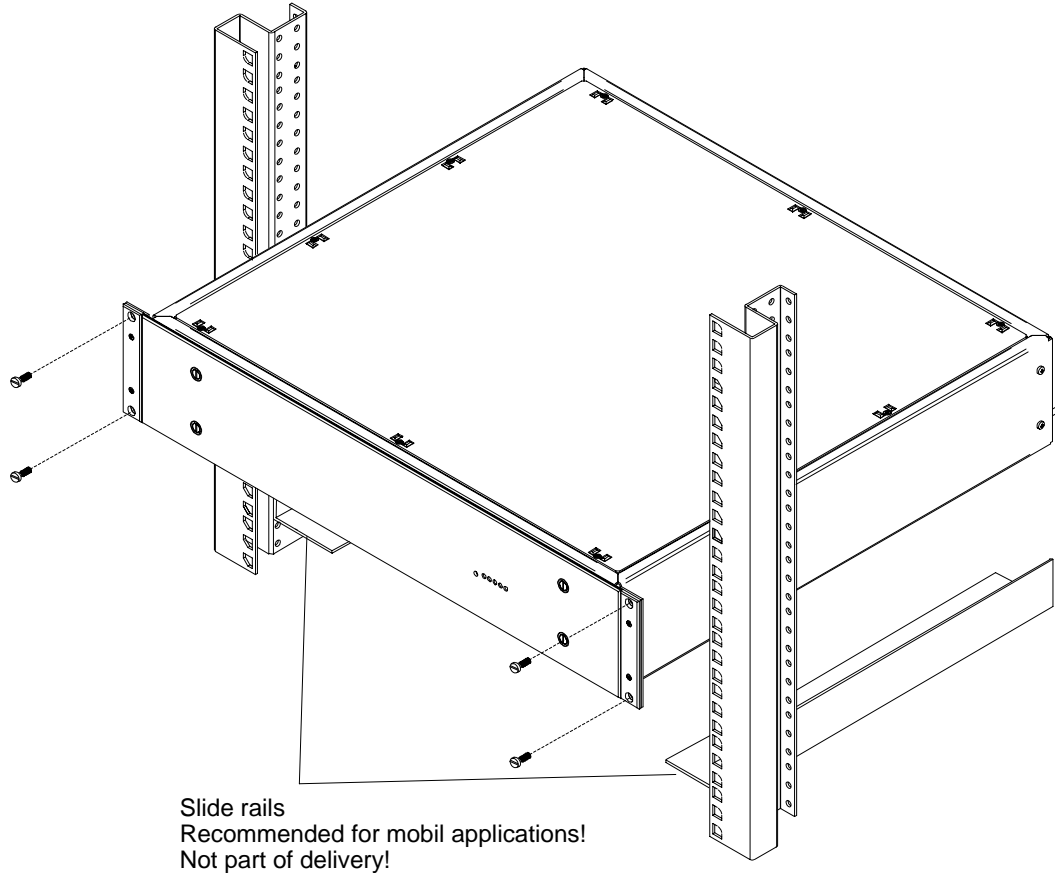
KayakDD-1 Video Processor Frame Rack Mounting
